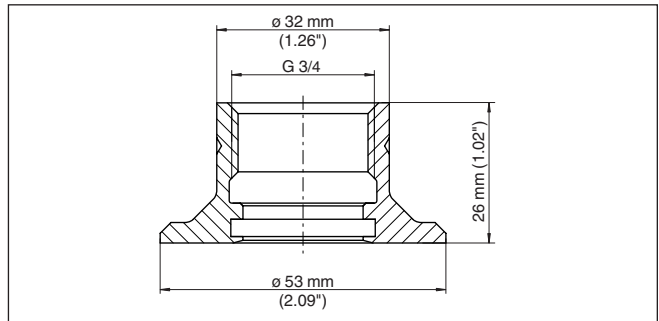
Dimensions of welded socket, G $\frac{3}{4}$  (DIN 3852-X)
